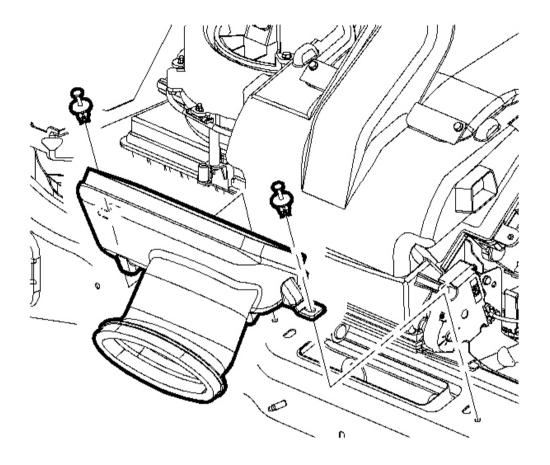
HVAC Module Seal & Nuts Courtesy of GENERAL MOTORS CORP.
